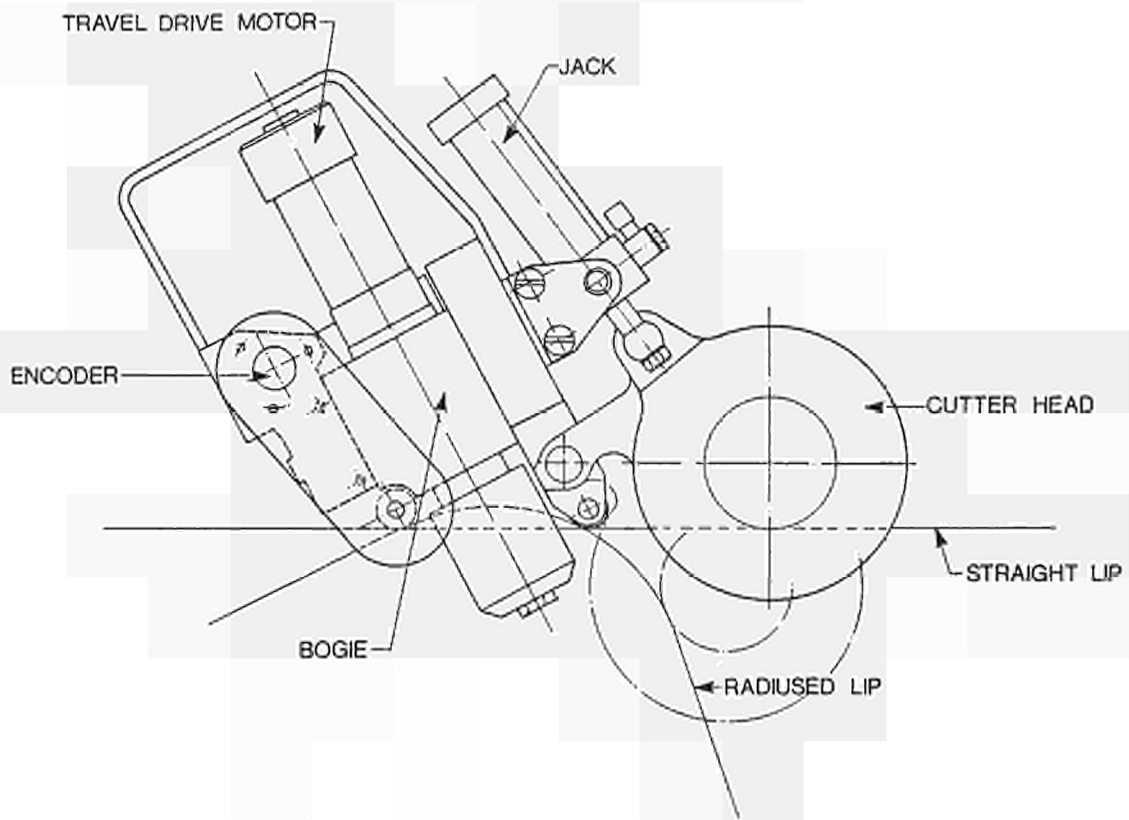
Compact cutting/welding trolley, fitted with cutting head
